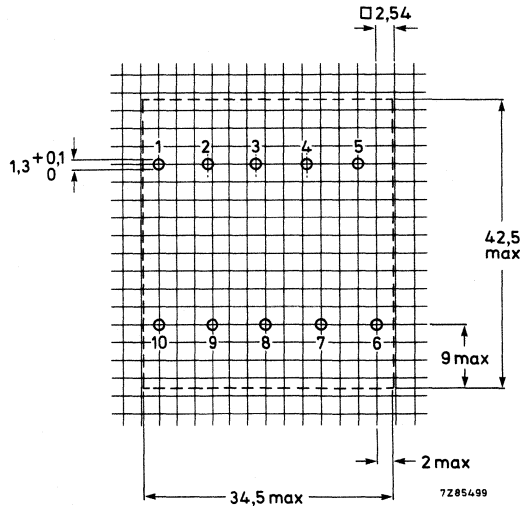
Hole pattern for mounting on a printed-wiring board, viewed from the solder side.
